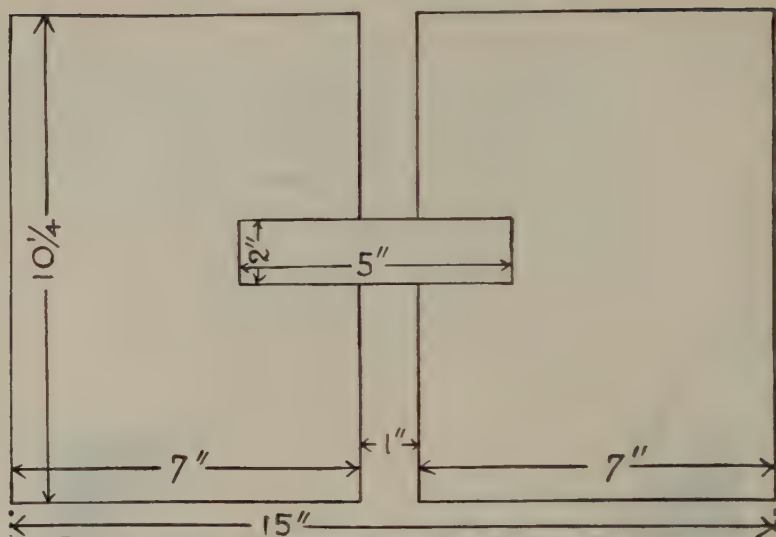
PAIR OF BOARDS HELD TOGETHER BY BACK WIDTH MEASURING STRIP
